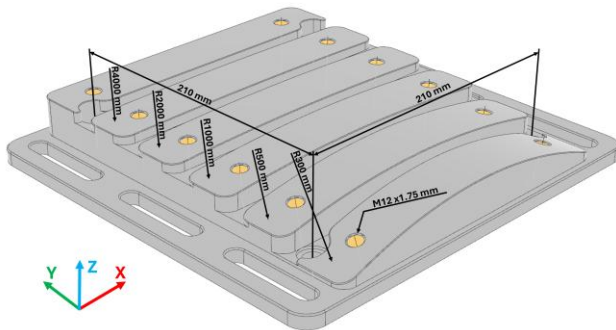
Geometry and main dimensions of the designed fixture for machining under bending loads.
